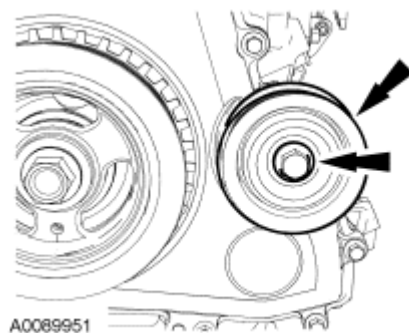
Locating Accessory Drive Belt Idler Pulley And Bolt
